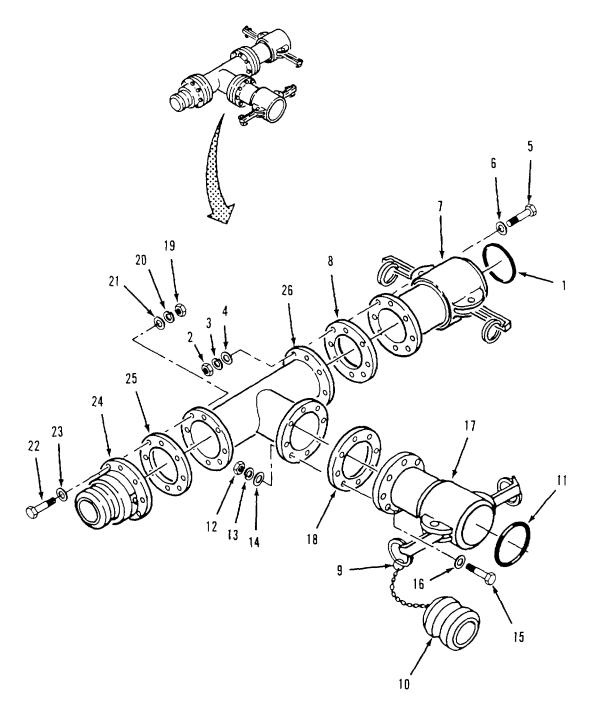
Tee Assembly (9112-Y3) Assembly
